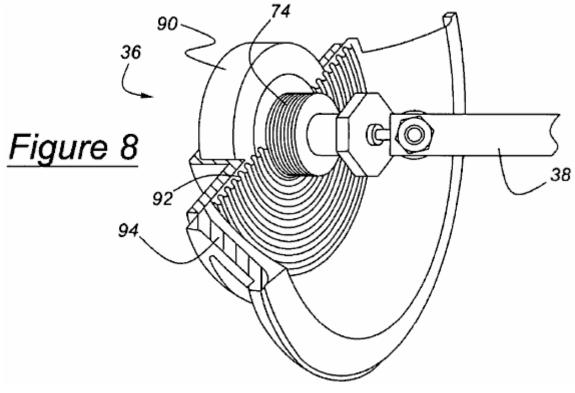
is isometric cross sectional view showing a driver that includes a solenoid and permanent magnet for oscillating the actuator arm in response to rotation of the rotor shaft
